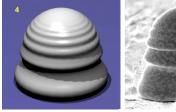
Model ²⁶ of jetted solder bump (left), and 80μm bump (right).
